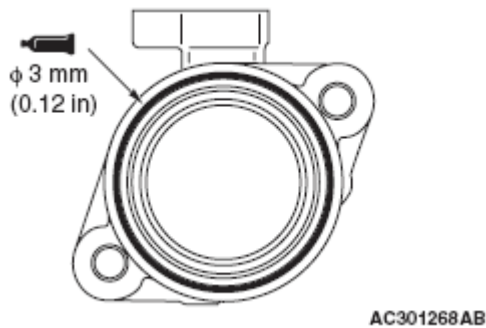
Applying Sealant To Camshaft Position Sensor Support Flange
